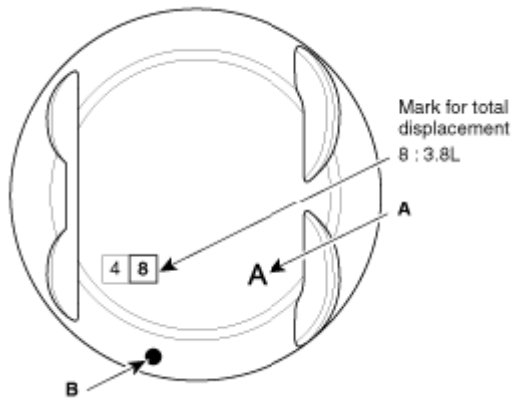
Checking Piston Size Code & Front Mark On Piston Top Face
